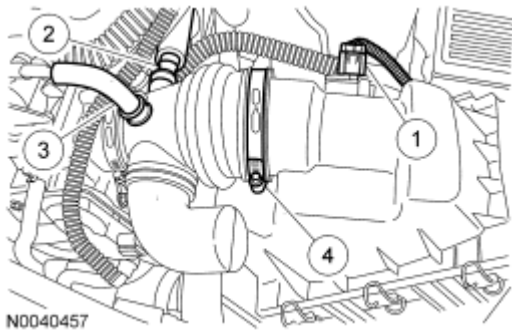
Identifying Mass Air Flow Sensor Electrical Connector, Engine Breather, Brake Booster Vacuum Hose And Clamp
